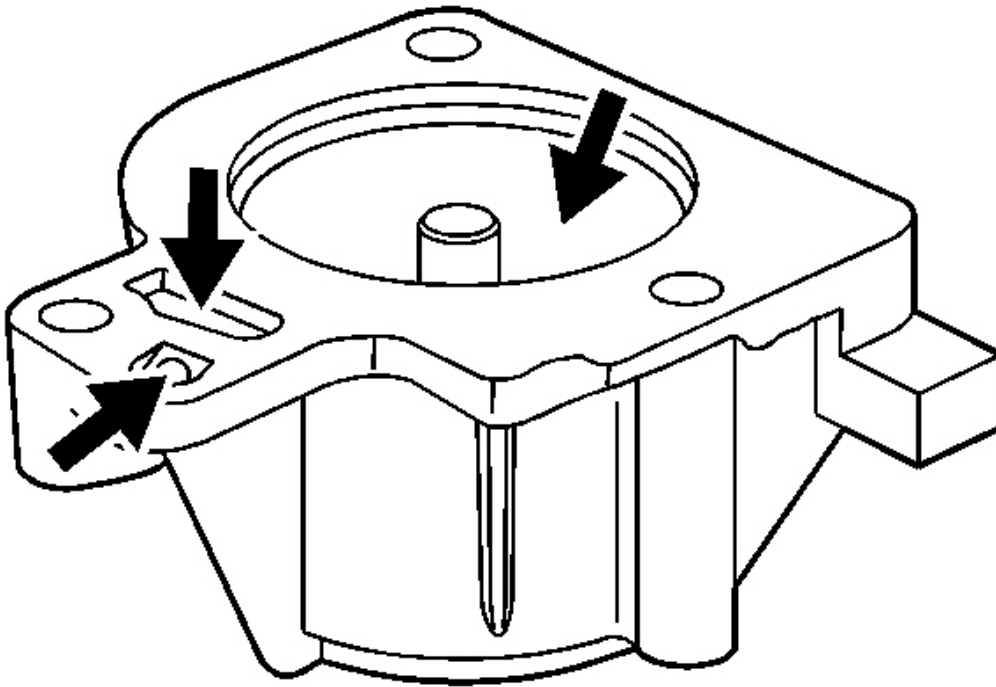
Locating 1-2 Accumulator Housing Inspection Areas
